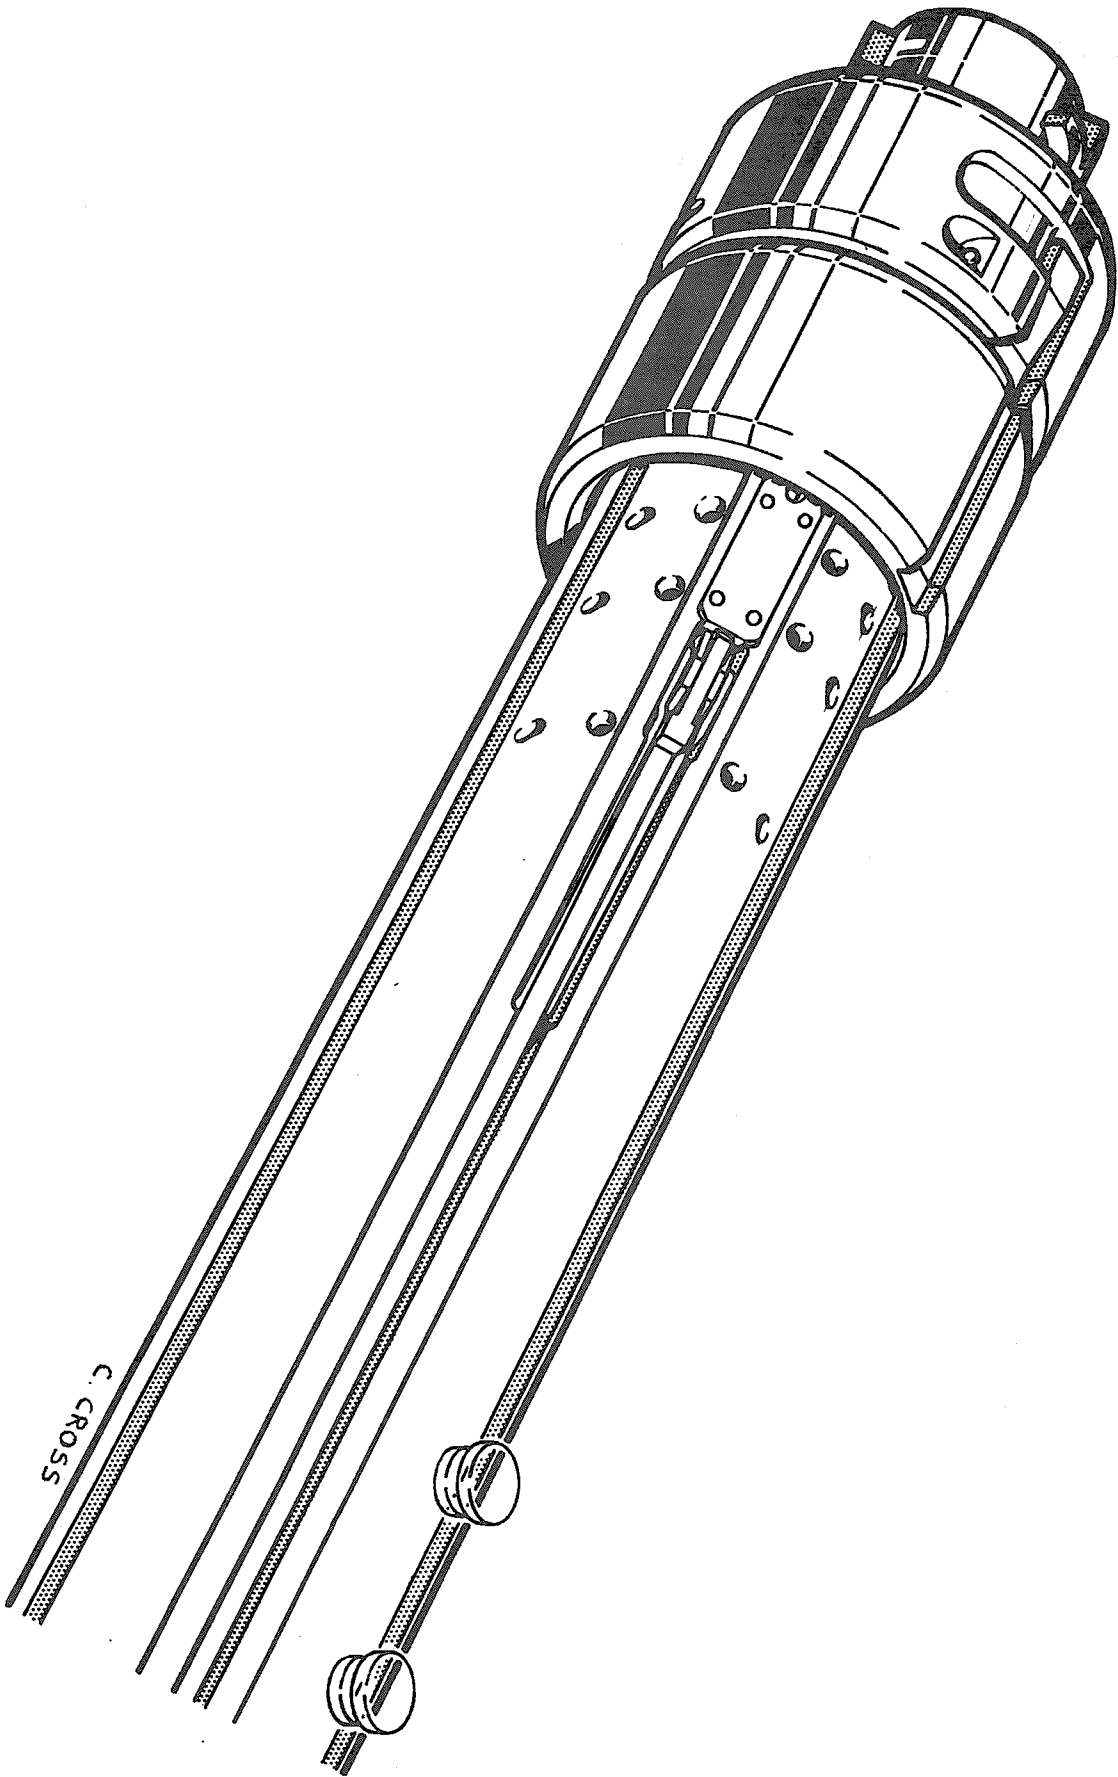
DETAILS OF CHARGING TUBE AND ADAPTER, CHARGING TUBE IN C2-A1 POSITION
